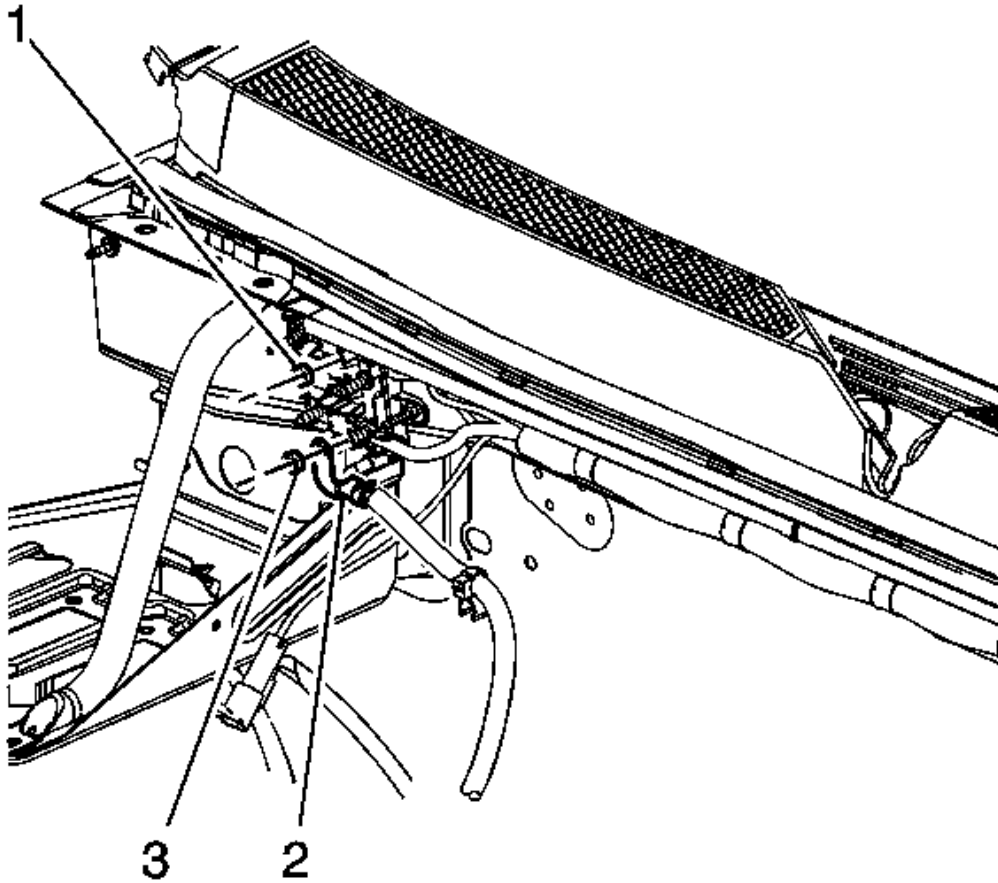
View Of Positive Cable Nut, Jumper Cable Terminal & Fuse Nut
